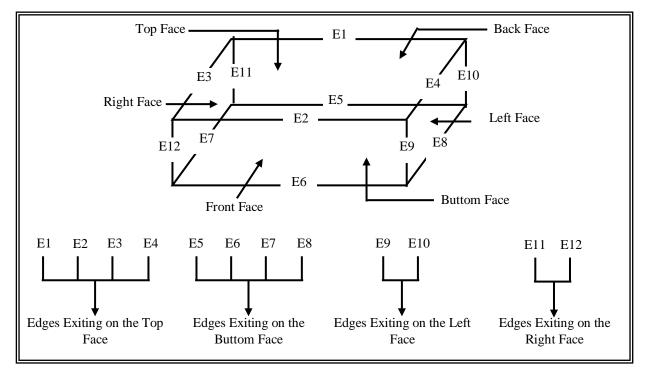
Relational Location of Machined Feature for Uniform Polyhedra Workpiece.
